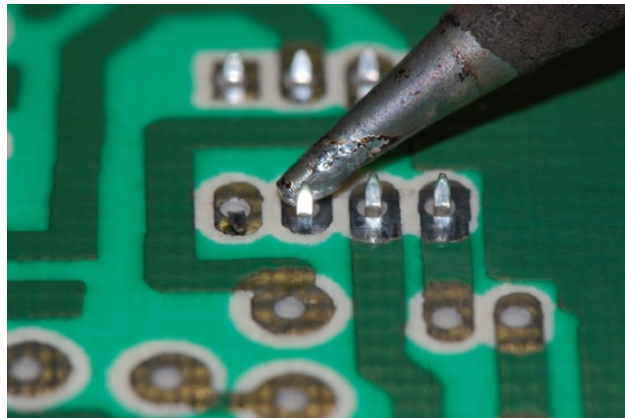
Soldering a component onto the back of a printed circuit board.
